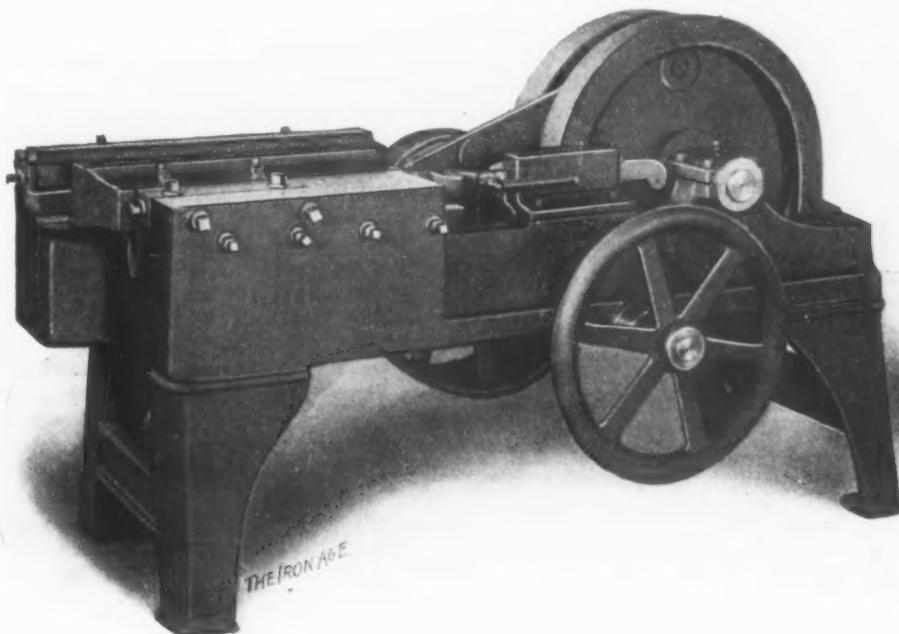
Machine for Rolling Threads up to $\frac{5}{8}$ Inch Diameter by $2\frac{1}{2}$ Inches Long.
